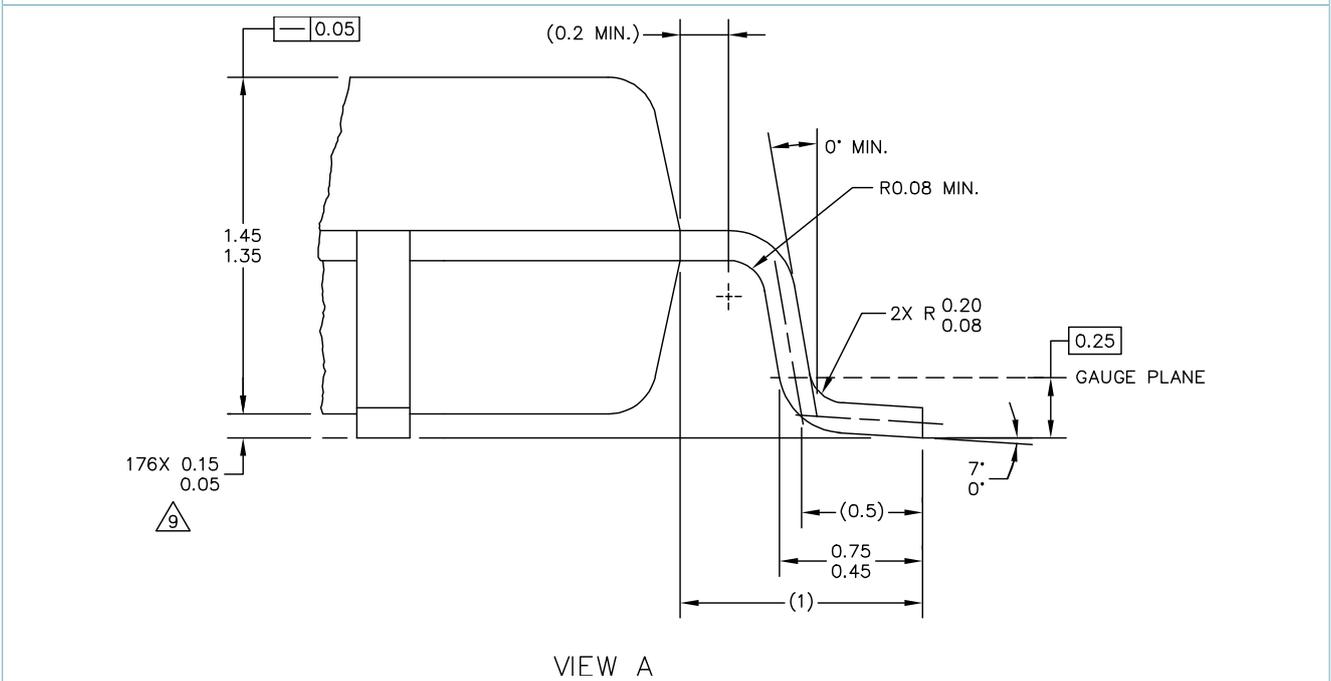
Package outline dt2 LQFP176 (SOT506-2)
